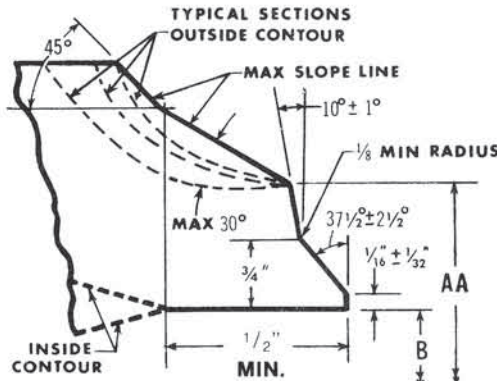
B.- Welding End for No backing Ring or for Split Backing Ring. Pipe Wall Thickness "t" Greater Than ⁷/₈ in.
